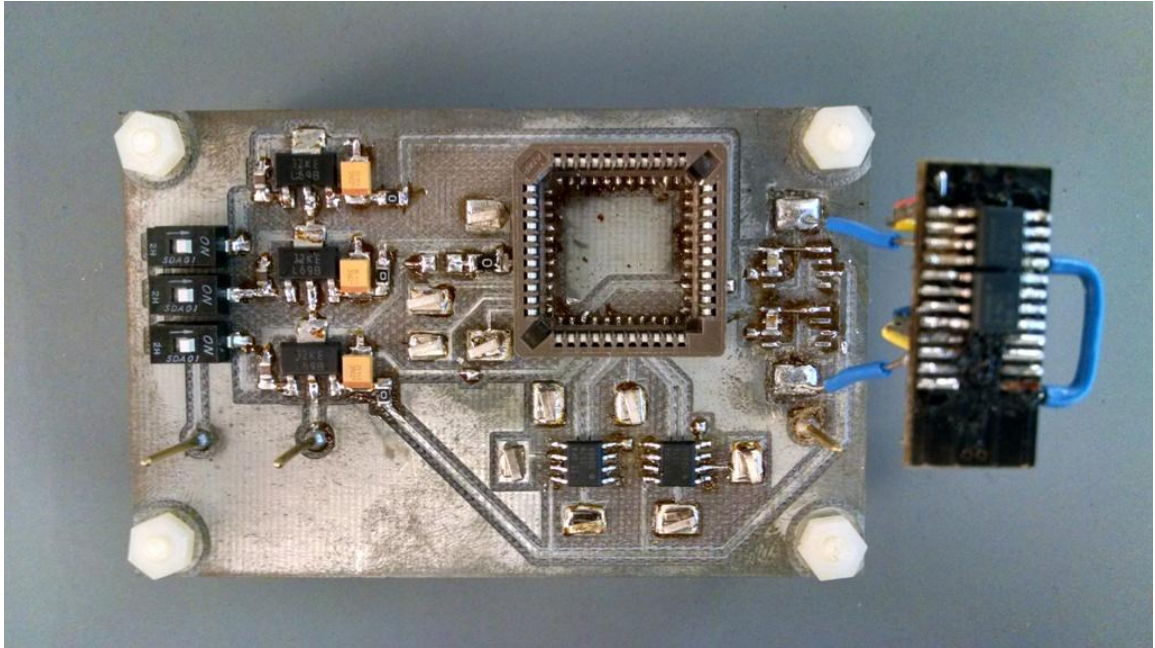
Custom-made PCB including off-chip electronic components for testing three demonstrated BG-switch applications.
